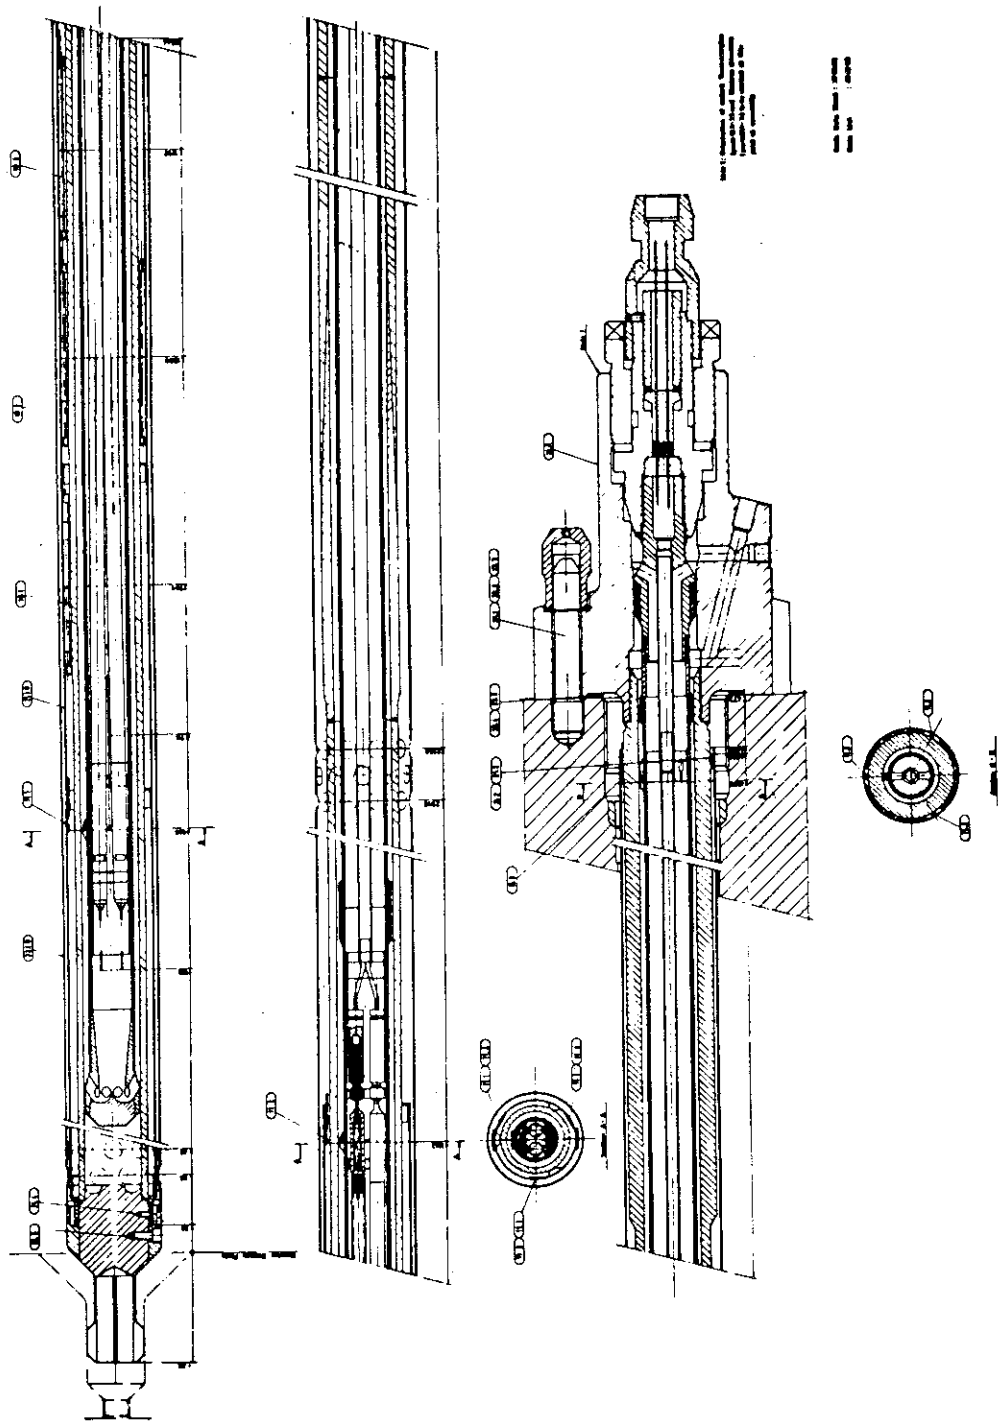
IFA-510 (MII) test assembly and pressure flask drawing
